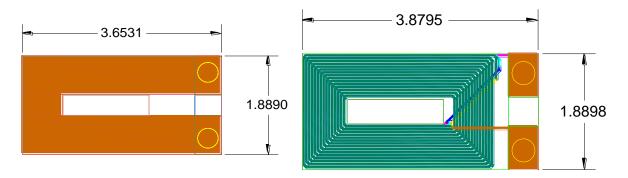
(a) Primary LTCC board dimension (b) Secondary LTCC board dimension. [Image by author]
